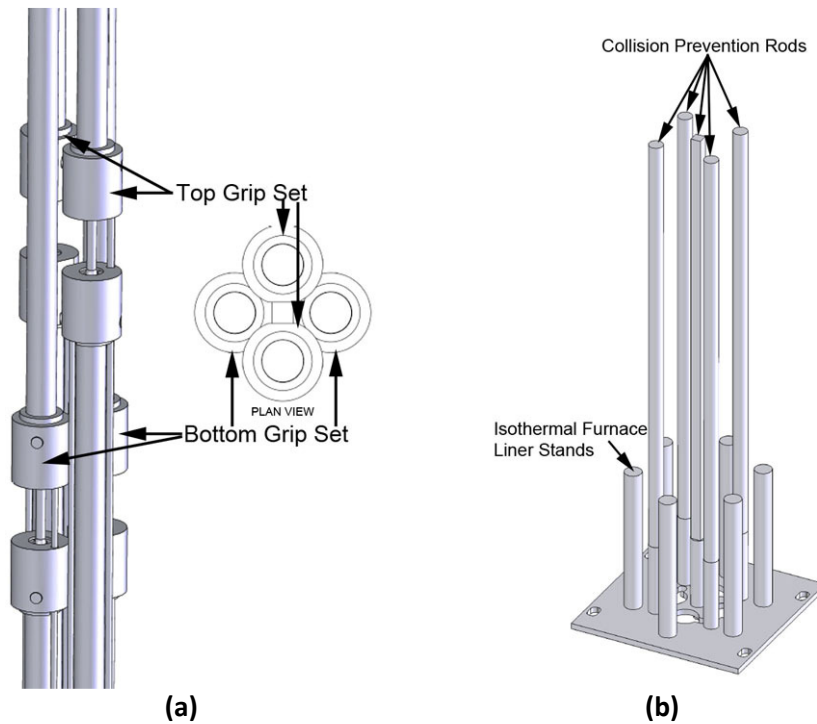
CAD drawings showing the (a) layout of the sample grip assemblies and (b) sample collision prevention system.
